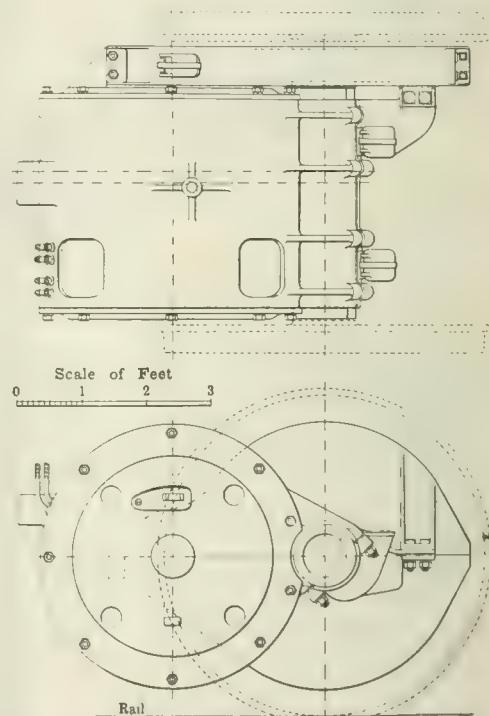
OUTLINE DRAWING OF 250 H.P. WESTINGHOUSE SINGLE-PHASE MOTOR.
